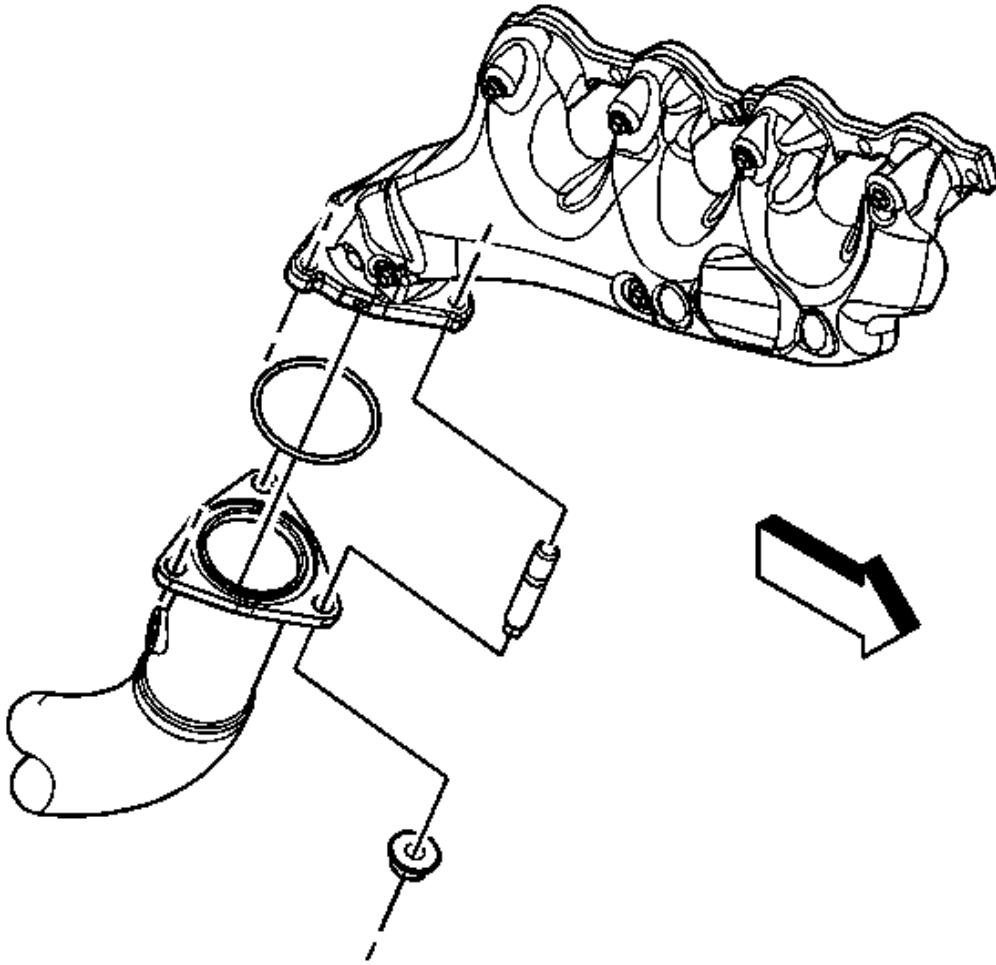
View Of Exhaust Manifold Pipe, Gasket, Bolt & Manifold
